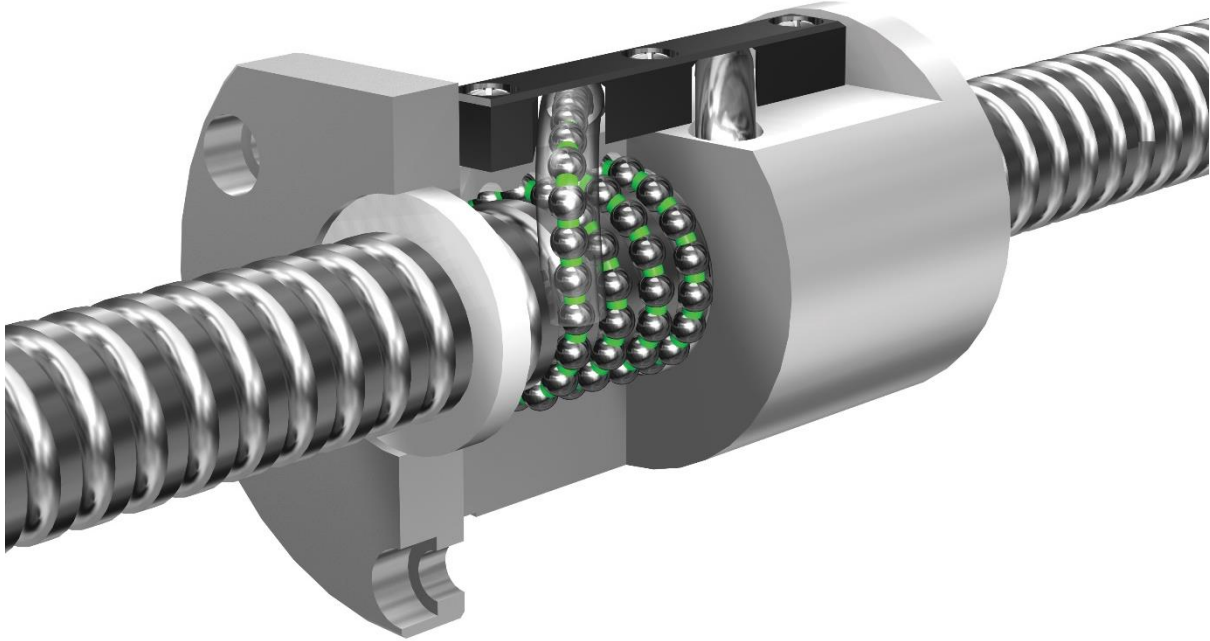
Example Ballscrew with Cutaway Section showing Ball Recirculation chamber (Design World, 2015). *Reproduced by permission of Design World.
